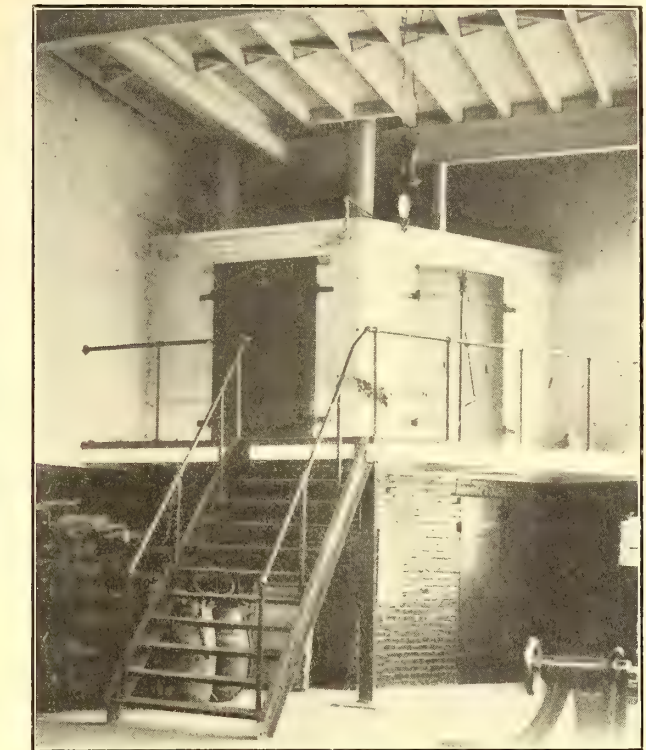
THE TWO-STORY ARMATURE OVEN
